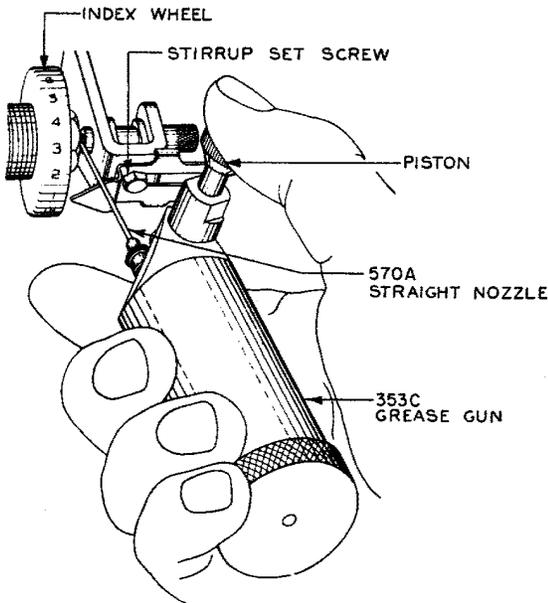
Method of Lubricating the Cam-Shaft Bearing at Index Wheel End
